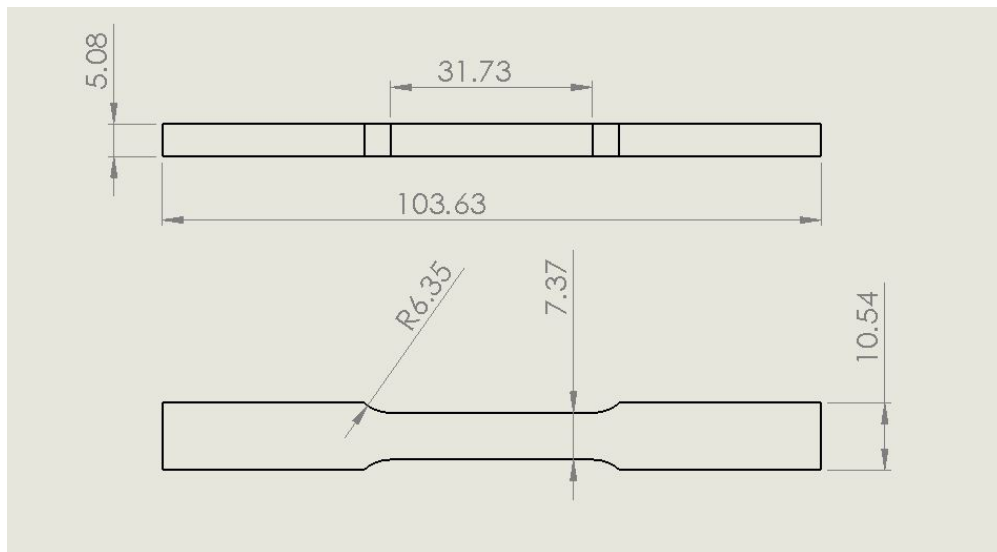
An Engineering drawing of the tensile bars after being machined.
